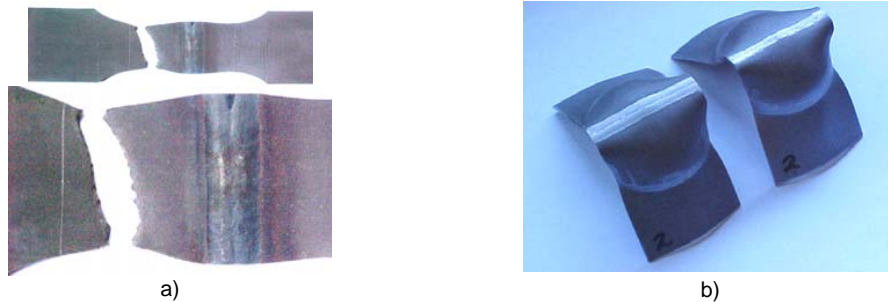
a) Fractured specimens after tensile test; and b) Specimens submitted to formability test
